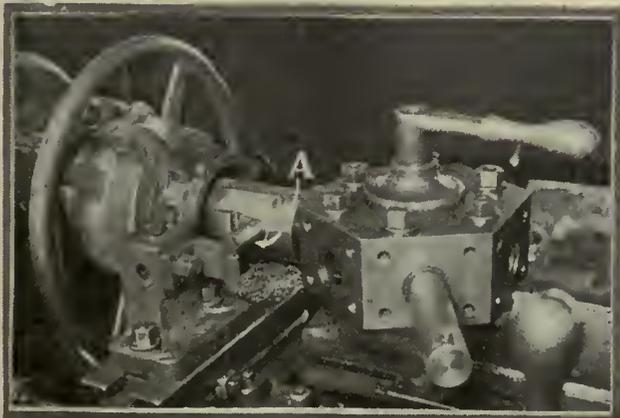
MACHINING THE UNIVERSAL BALL JOINT SOCKET.
